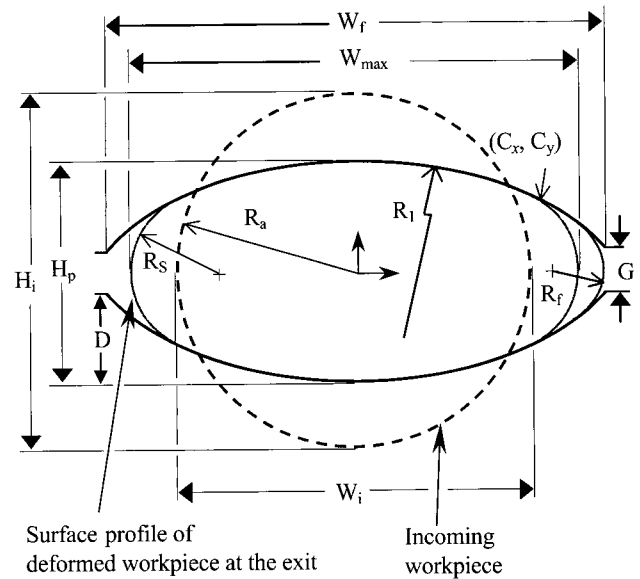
Geometrical designation of oval roll groove and the radius of the surface profile,  $R_s$ , of a workpiece for the round-oval pass rolling
